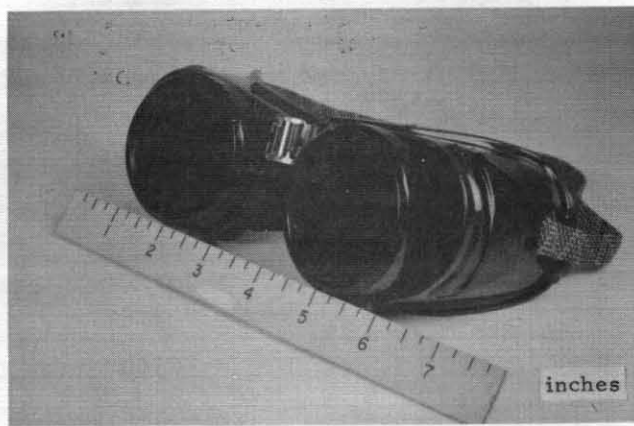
COVER CUP GOGGLE FOR WELDING AND CUTTING PROTECTION
